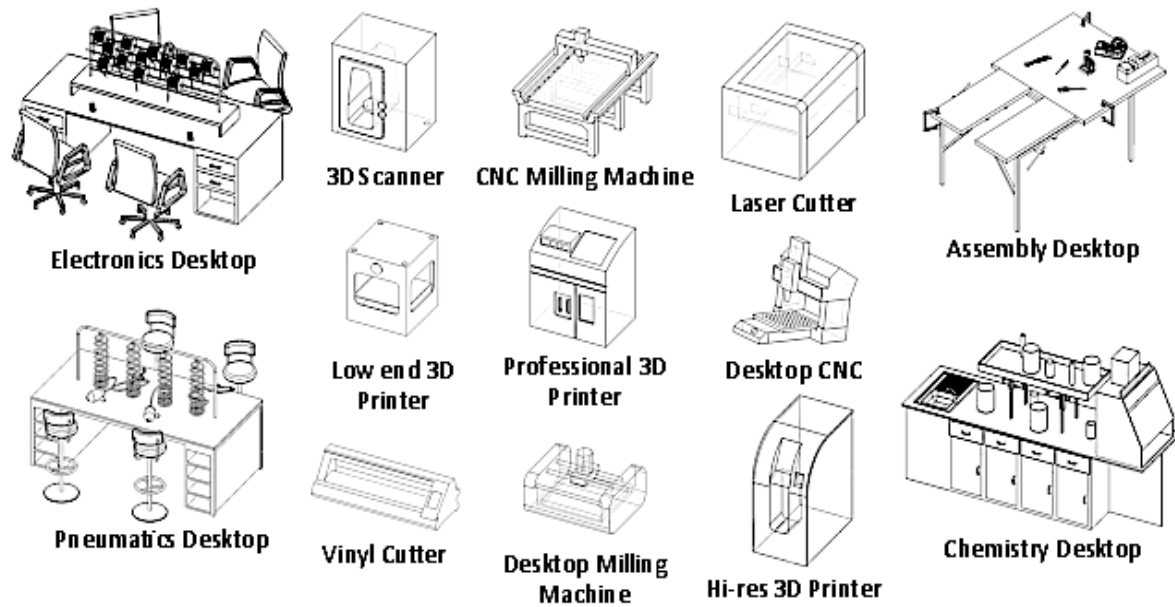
Desktops for specialized work on electronics, pneumatics, chemistry and assembly. Also are shown most of the digital fabrication tools available on the Digital Fab Lab UChile, as 3D Printers, CNC Milling Machines, Vinyl Cutters and Laser Cutters.
